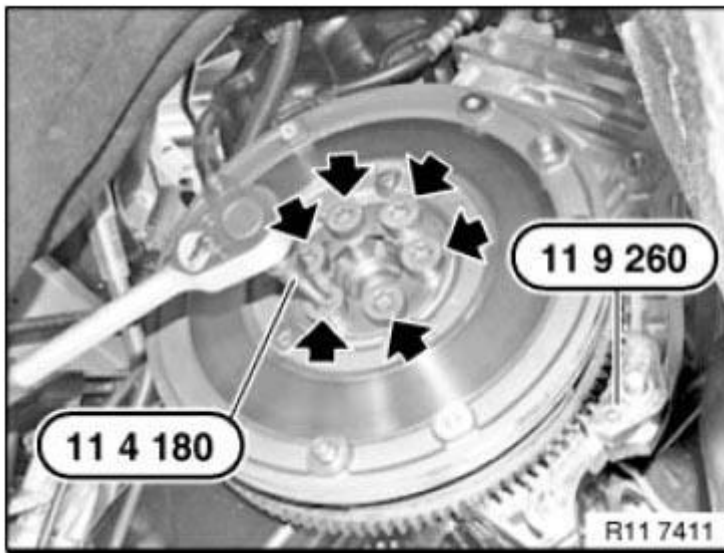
Removing Flywheel Bolts Using Special Tool 11 4 180
